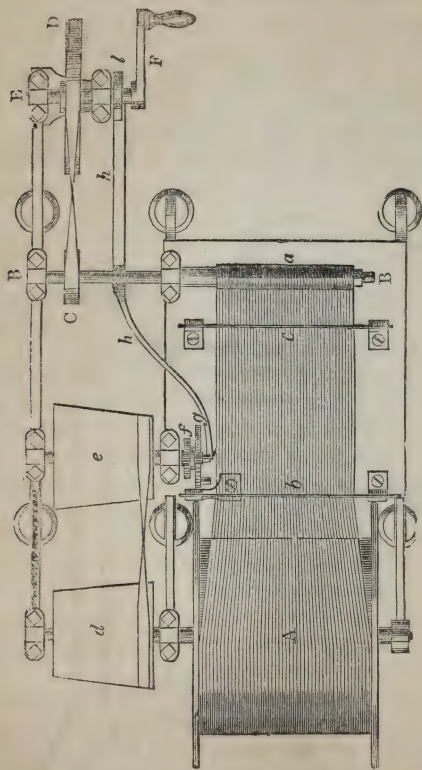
Bobbin-filling Machine. Ground Plan. Scale, about two inches to the foot.
